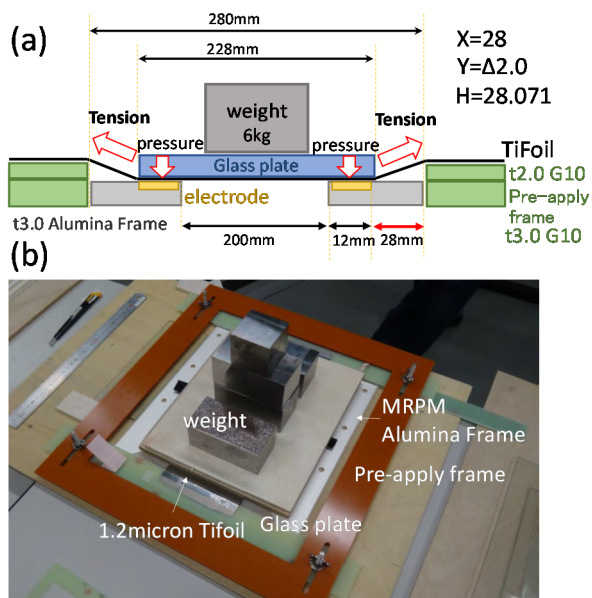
Tensioned foil was welding with epoxy based glue by weighting. (a) Schematic view, (b) actual photo.
